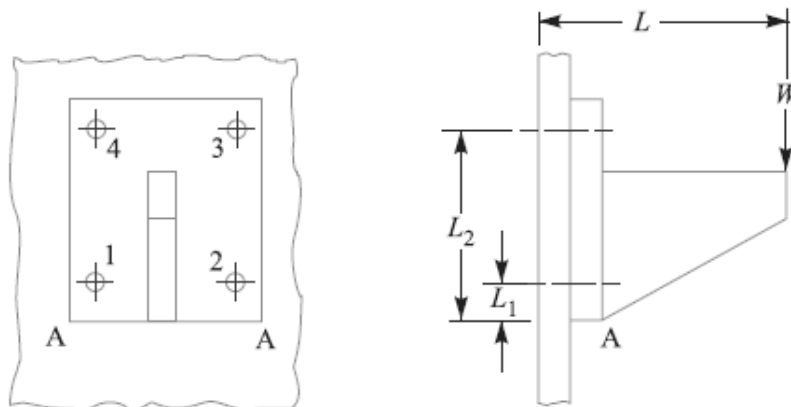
Eccentric load perpendicular to the axis of bolts.
